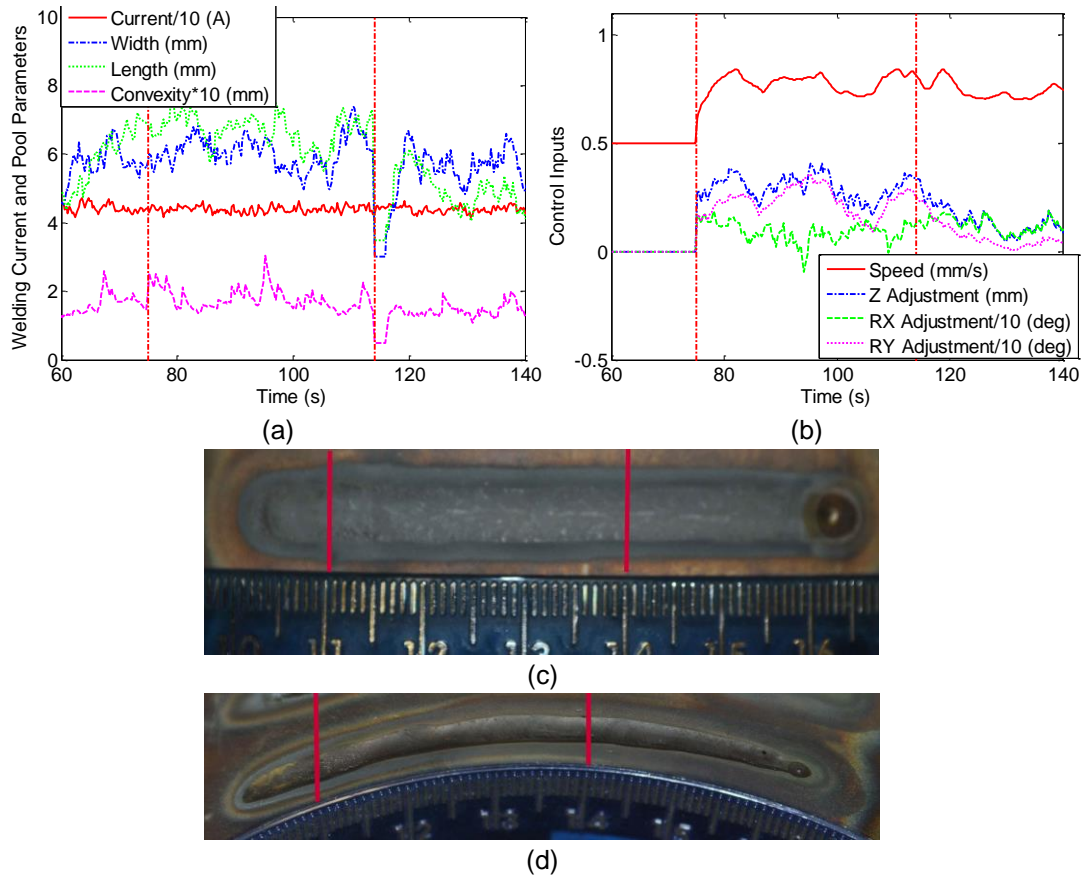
Experiment 3 results (a) Welding current and weld pool parameters (b) Control inputs (c) Front-side bead (d) Back-side bead.
